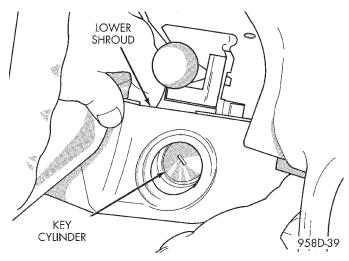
Remove Lower Shroud From Ignition Cylinder
